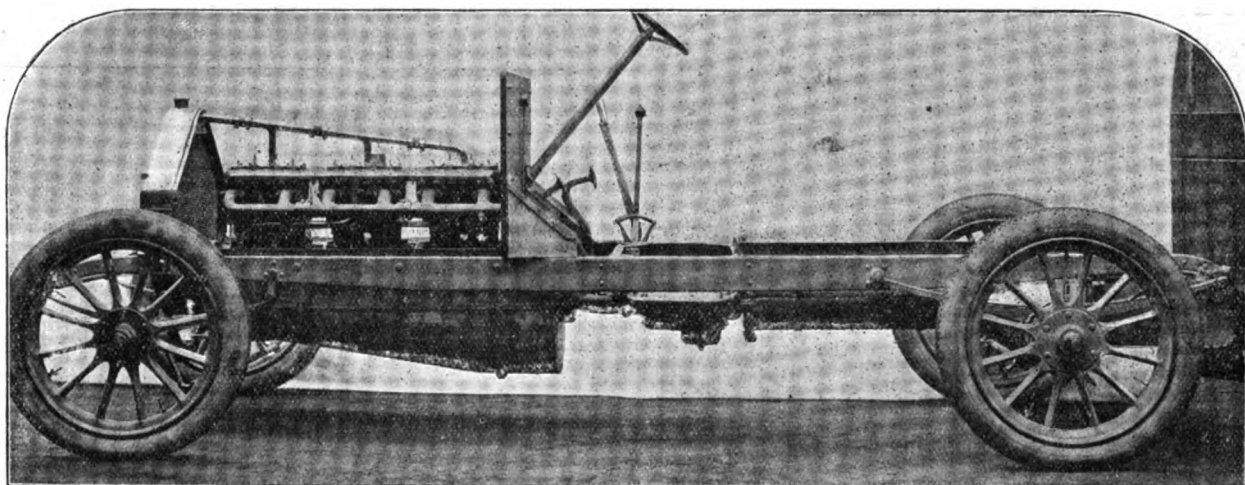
Chassis of Iris 40-h.p. Six-cylinder Car.
